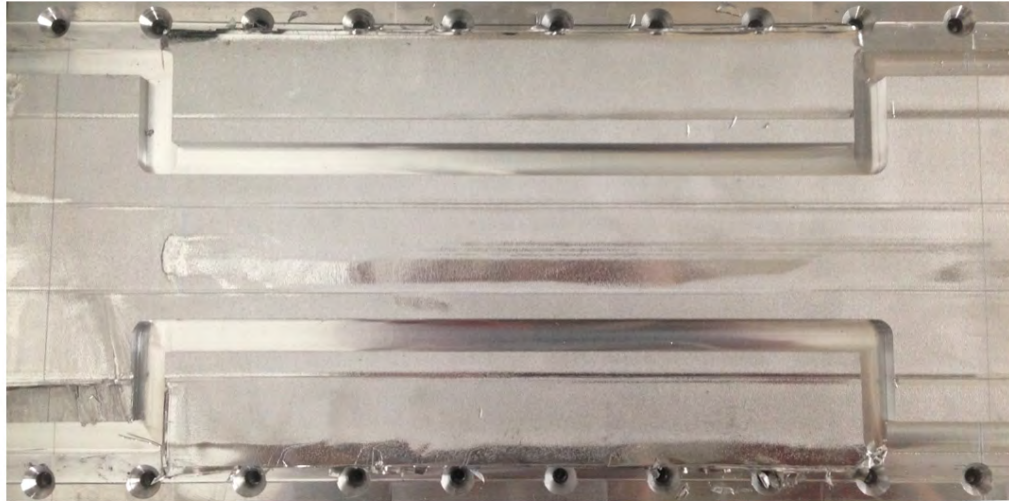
Large geometry sample following CNC milling operations within the UAM machine to achieve the desired outline.
